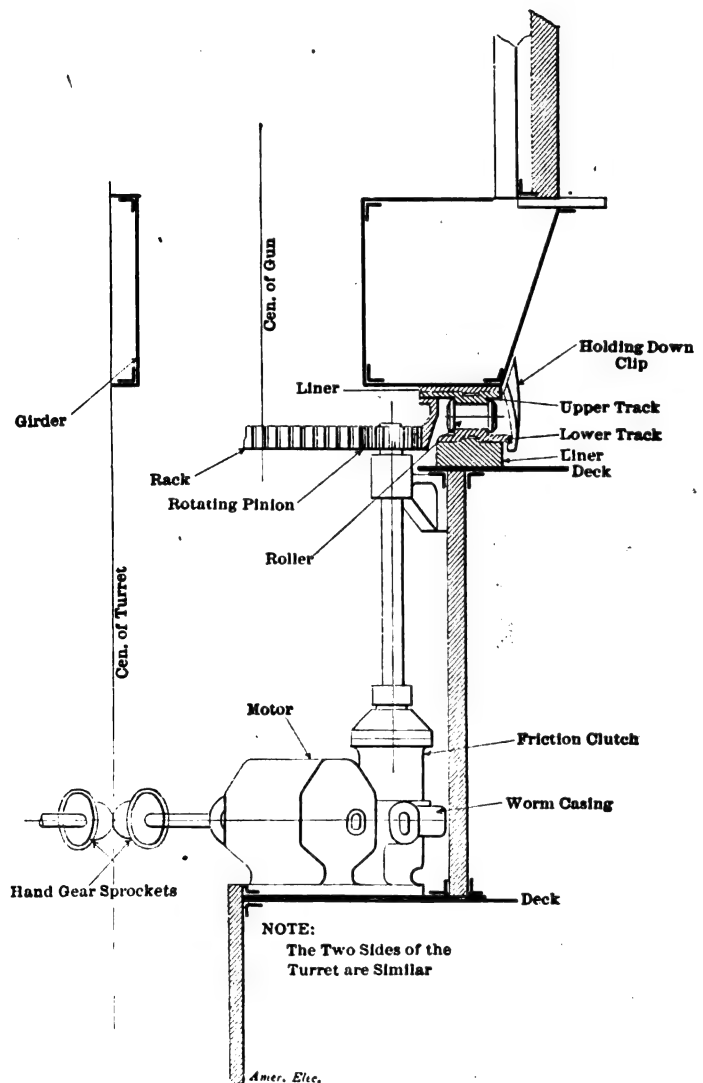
ARRANGEMENT OF TURRET-TURNING GEAR.
